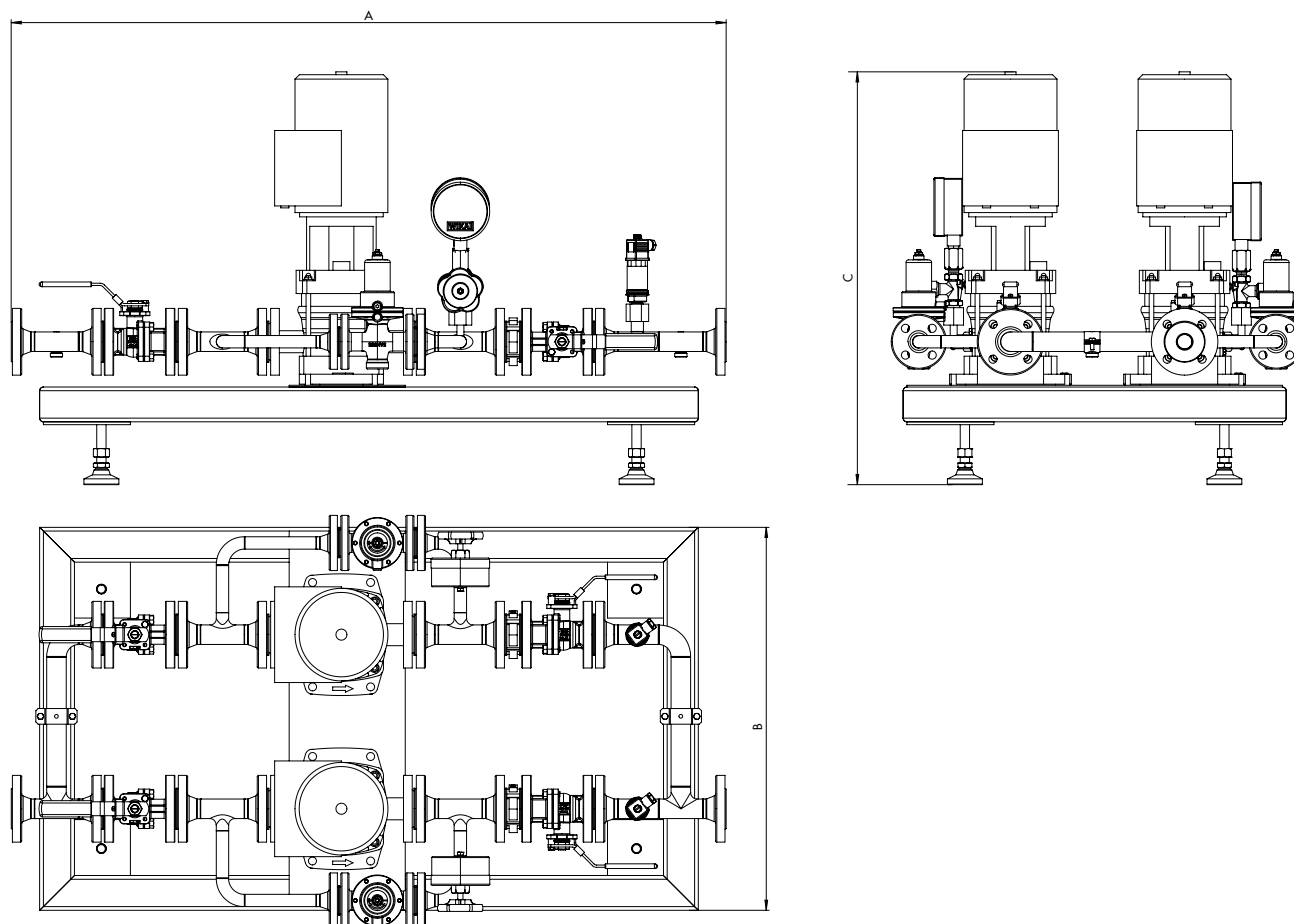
Dimensions and weights of Type 7111-1/-2 Pump Assembly - Schematic drawing
